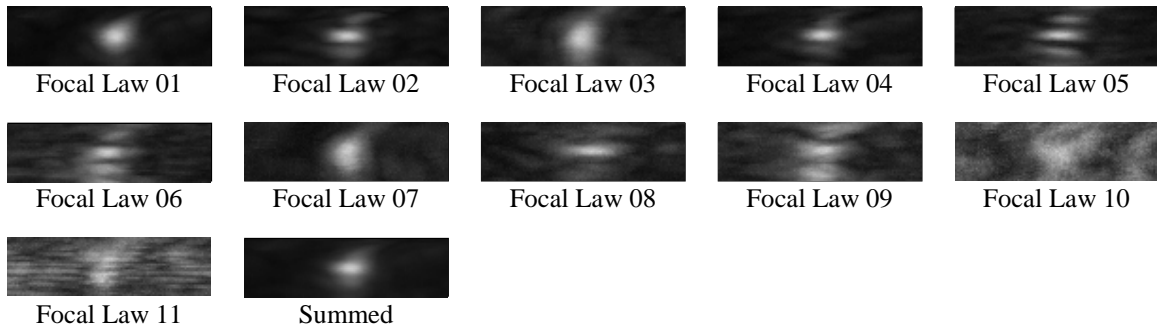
3D method inspection C-scans of curved interface forging coupon #6.
